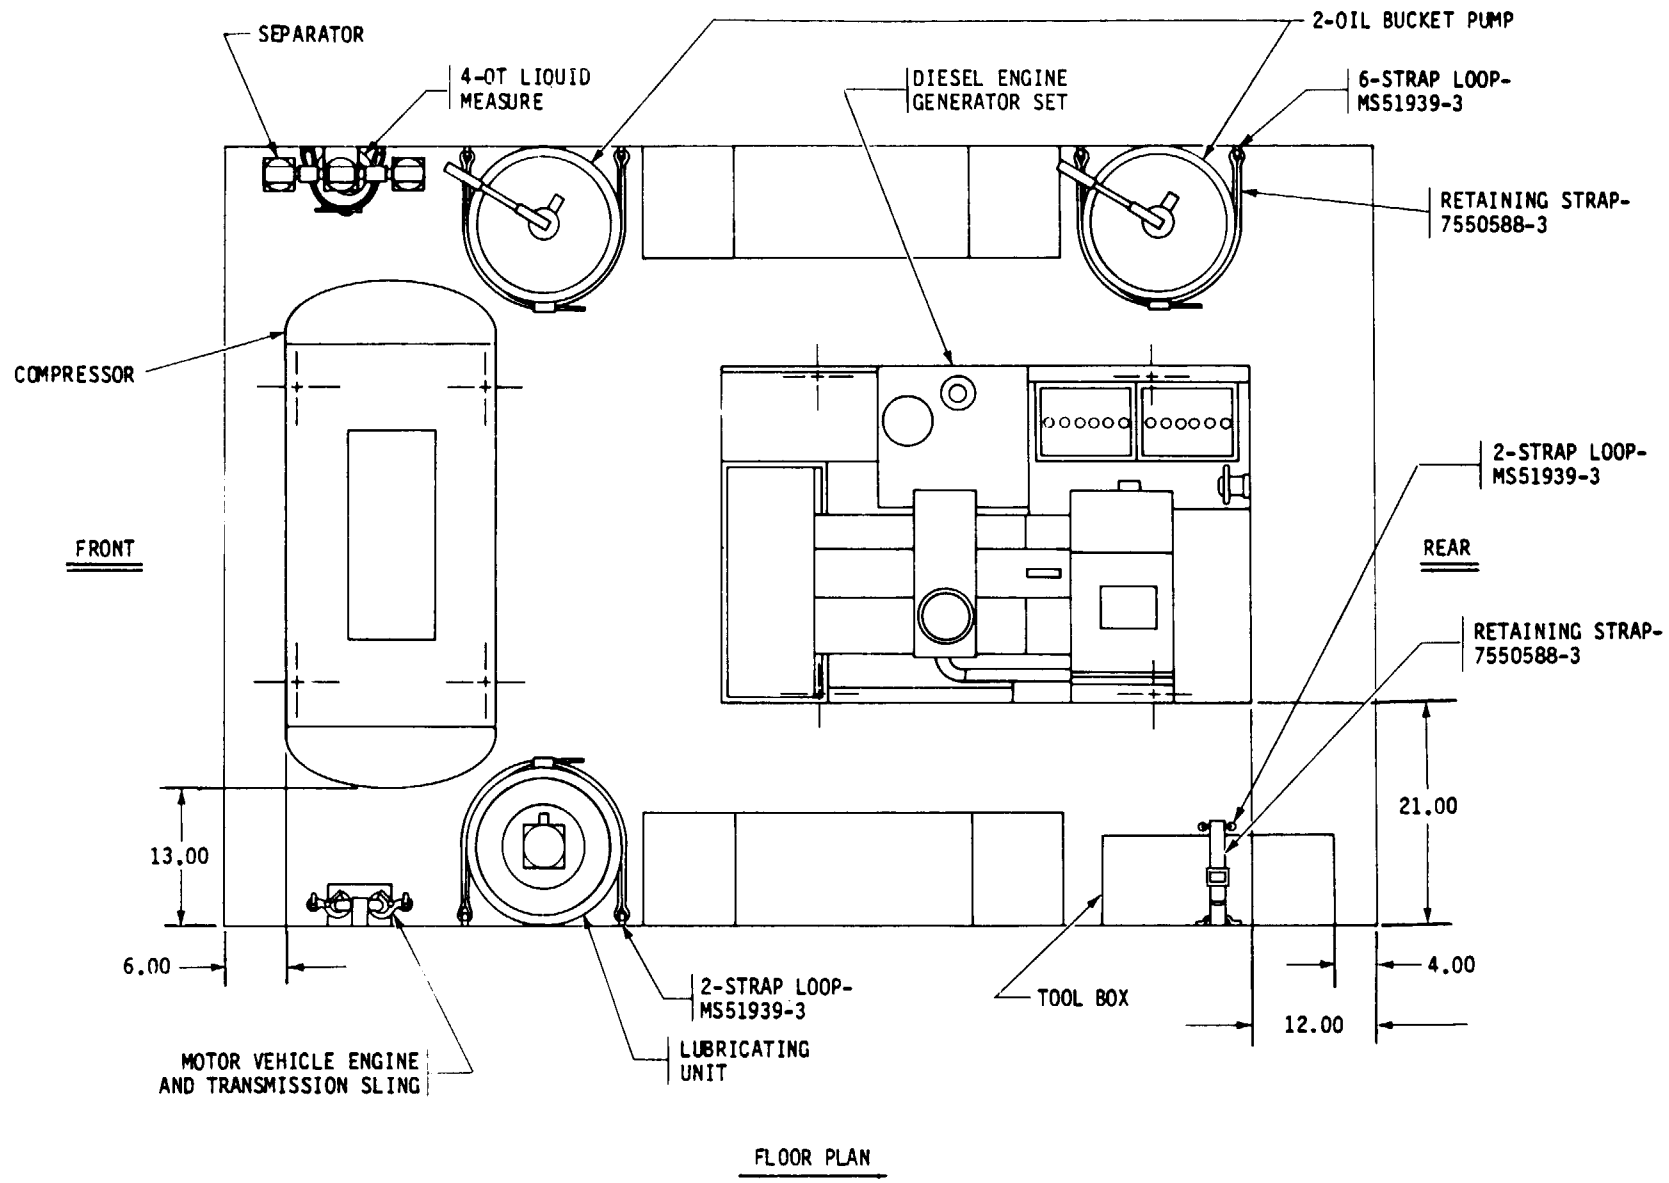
Components to be Mounted, Unit 4, M105A2, Floor Plan.
